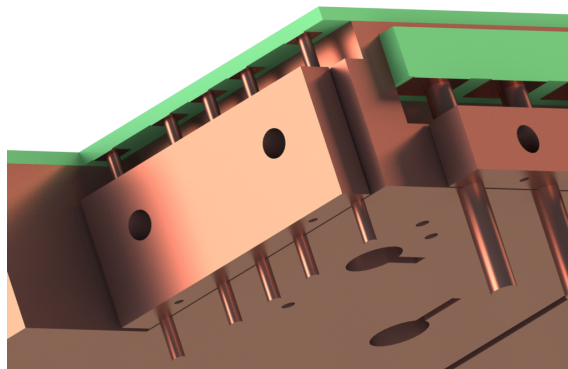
Closeup of solderpads and clamps. Not visible are the screws that fix the clamps.
